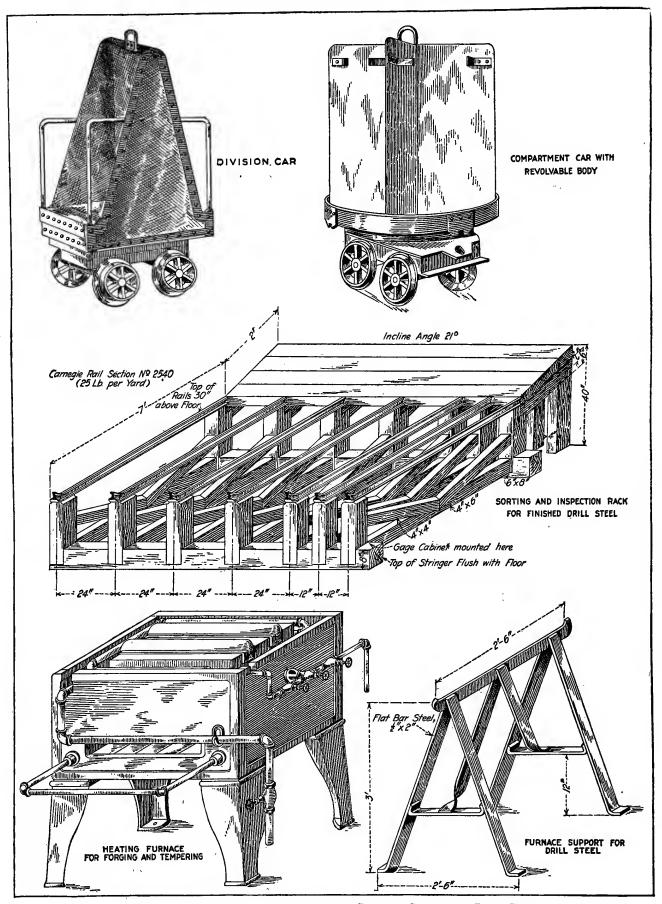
ACCESSORY EQUIPMENT FOR IDEAL SHOP FOR SHARPENING DRILL STEEL
